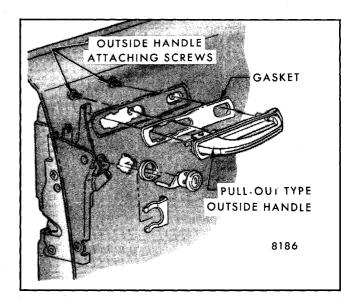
Outside Handle Removal (Pull-Out Type)
